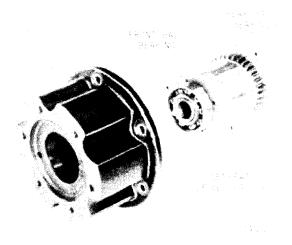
Pressing generator drive gearshaft from ball bearings. Model AVDS-1790-2C Engine.
